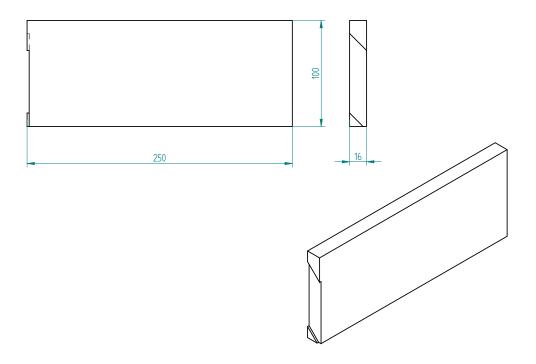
Shaped part :  ${\bf face\text{-}1}$  for  ${\bf perpendiculator}$  tool
